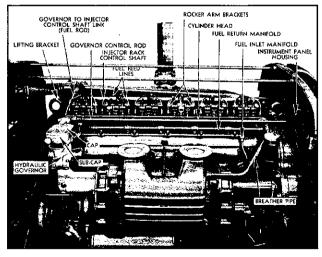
Hydraulic Governor Mounting and Connections to Injector Rack Control Tube.
